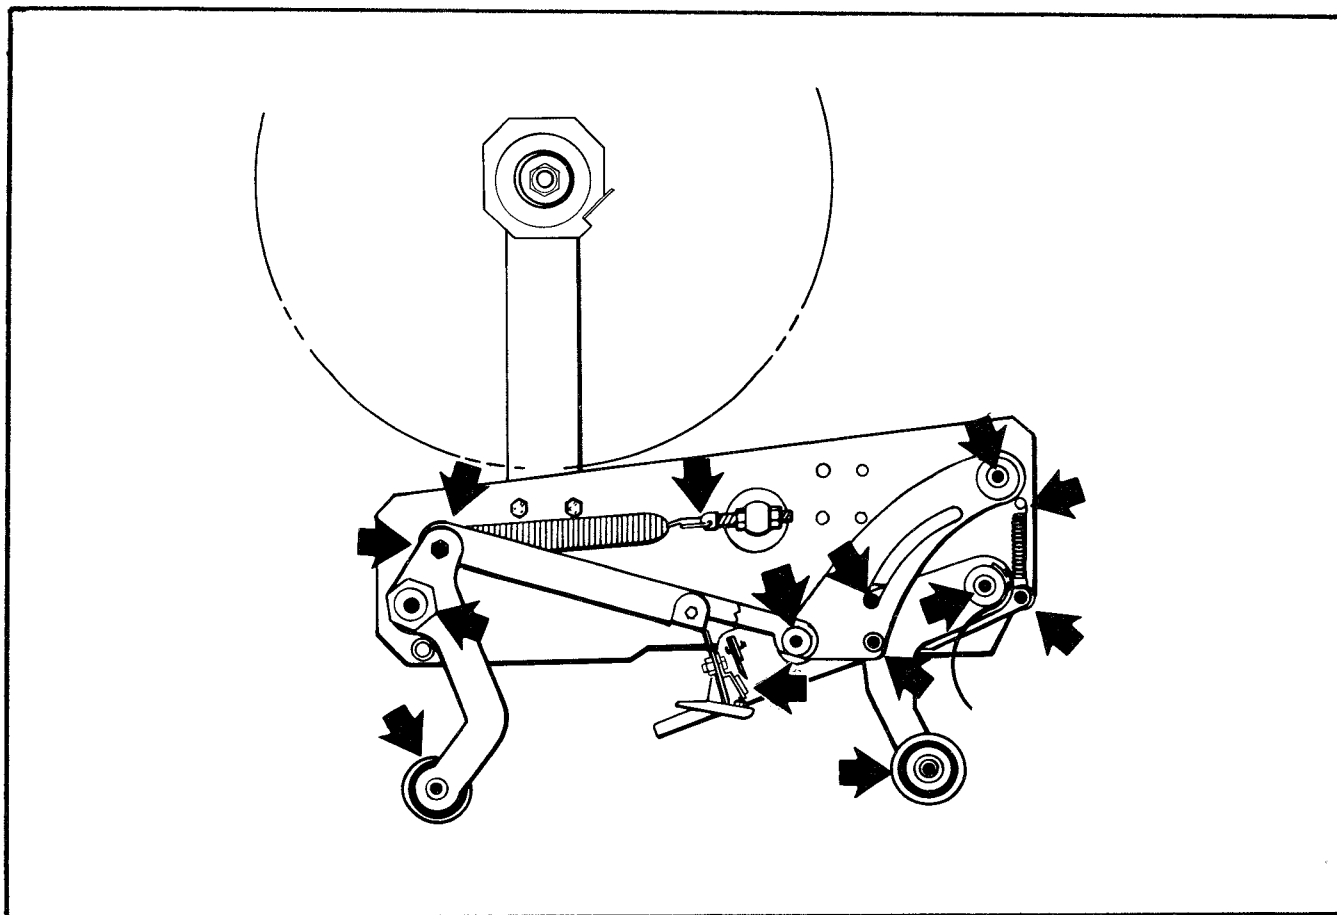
LUBRICATION POINTS - TOP & BOTTOM TAPING HEADS
